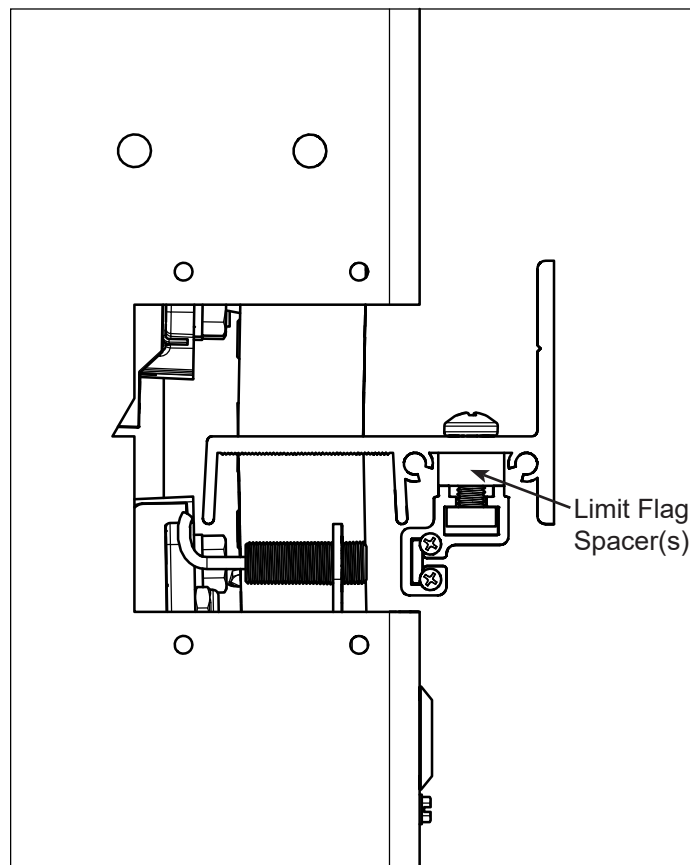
Flanged Drive Rail with Limit Flag and Spacer
